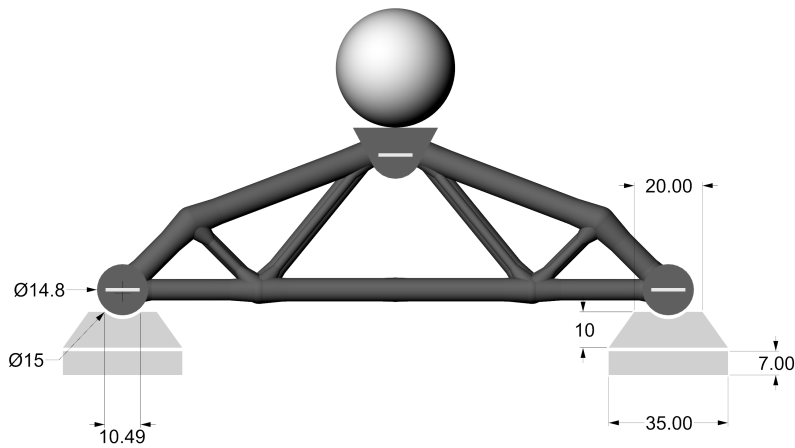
Example 1: load testing arrangement. (All dimensions are in mm)
